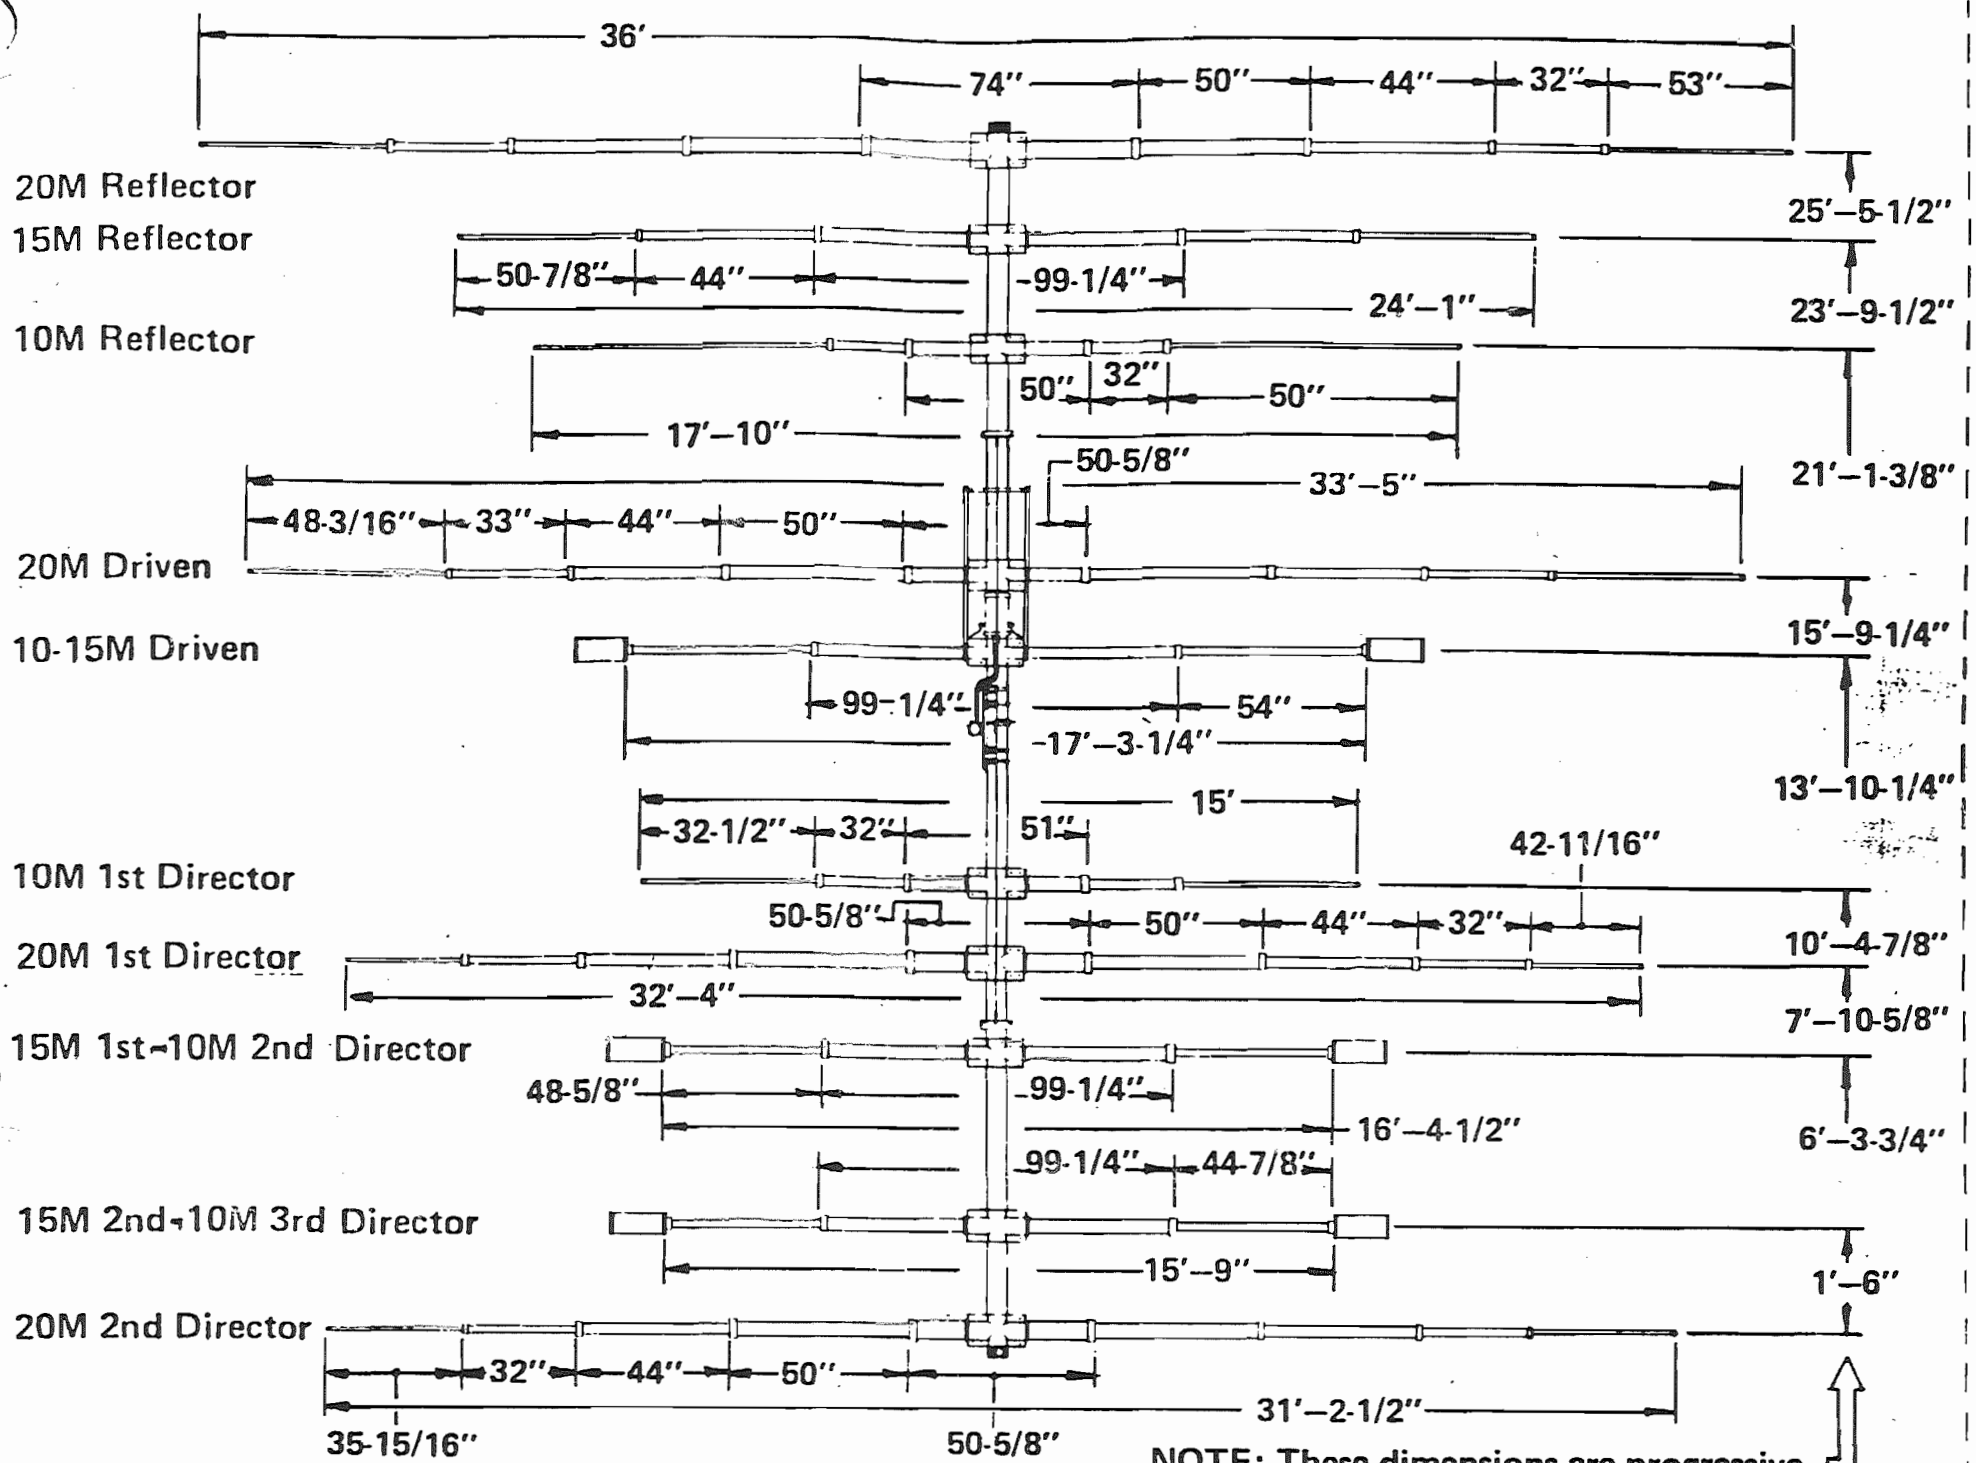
and 4 show a top view of the assembled antenna, and gives part numbers and principal dimensions for assembling and installing the elements. Refer to the parts list for complete descriptions and specifications and to Figures 6 - 8 for specific assembly details and hardware call outs.
